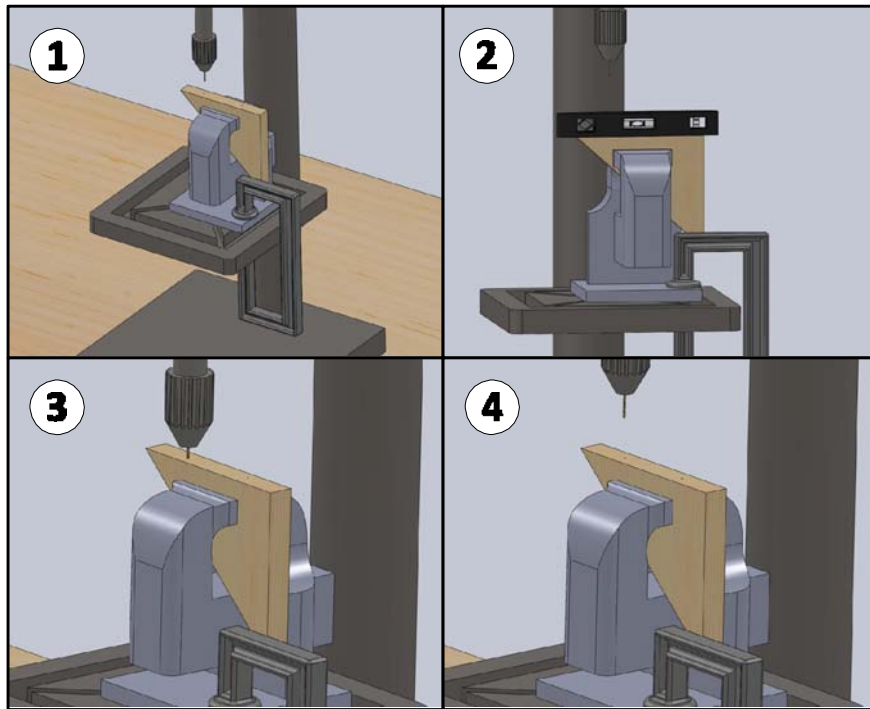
(1) Align the bit and the first hole. (2) Make sure the gusset is level and secure clamp. (3) Slowly drill the pilot hole. (4) Finished hole.
